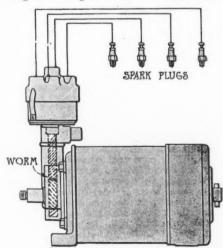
One unit of a two-unit system. This is a combined lighting and ignition generator, the cranking apparatus being separate. The distributor is driven by a vertical shaft
